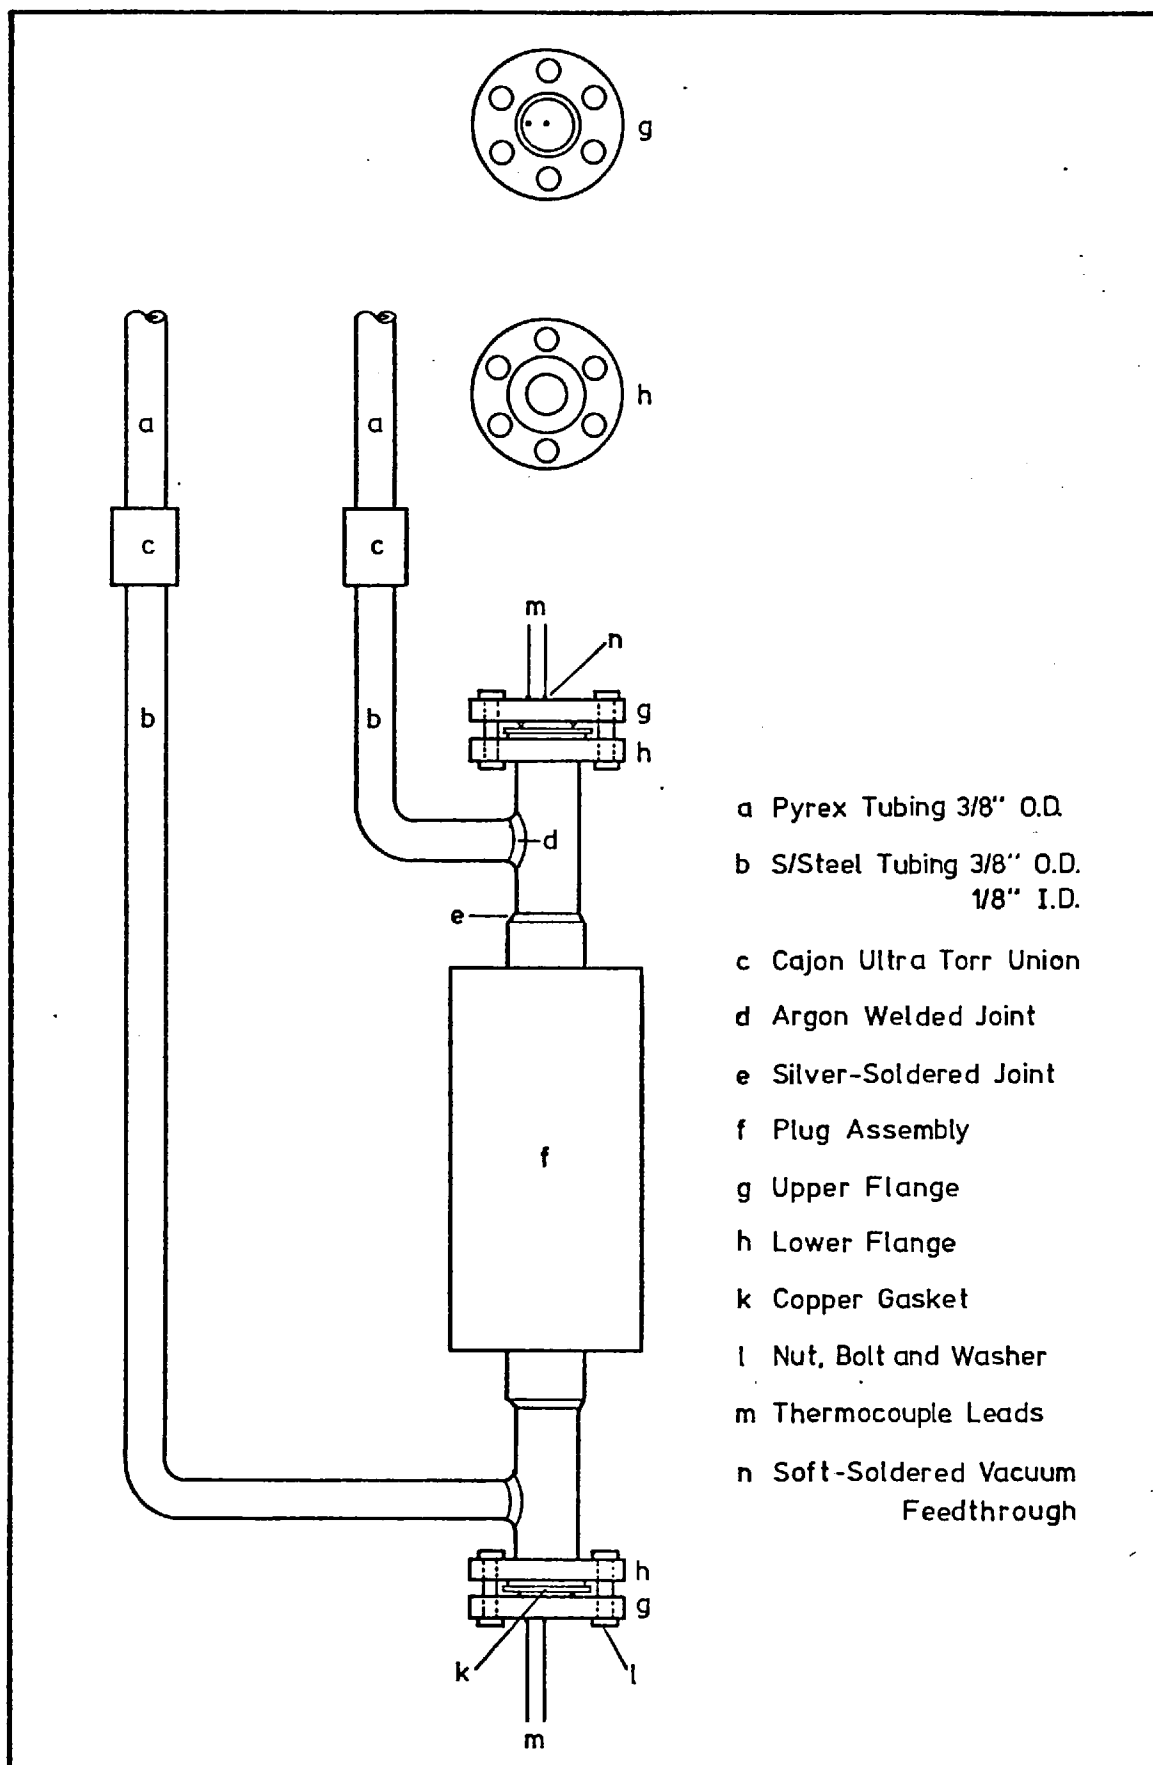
Miniature Flange Arrangement and Connection of Plug Assembly to Vacuum System
